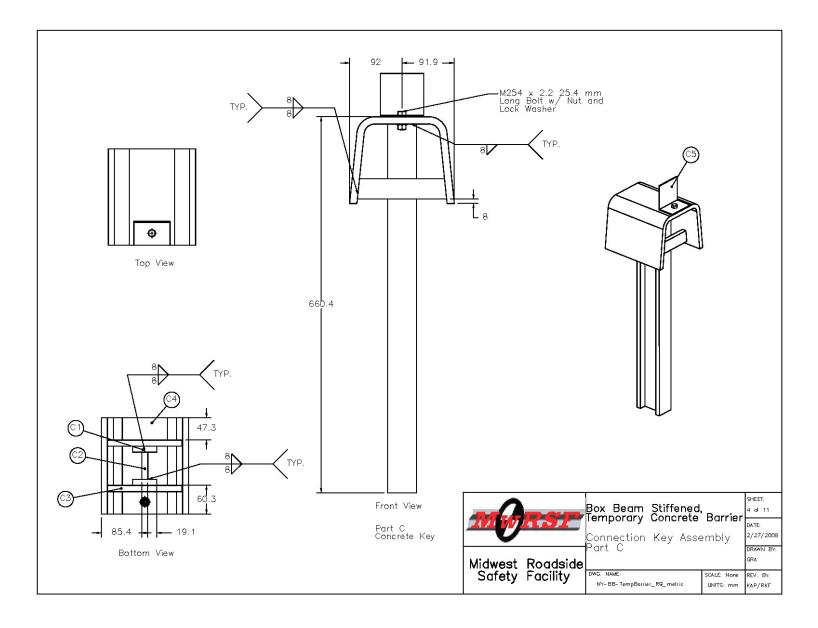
Connection Key Assembly Details, Test NYTCB-1
